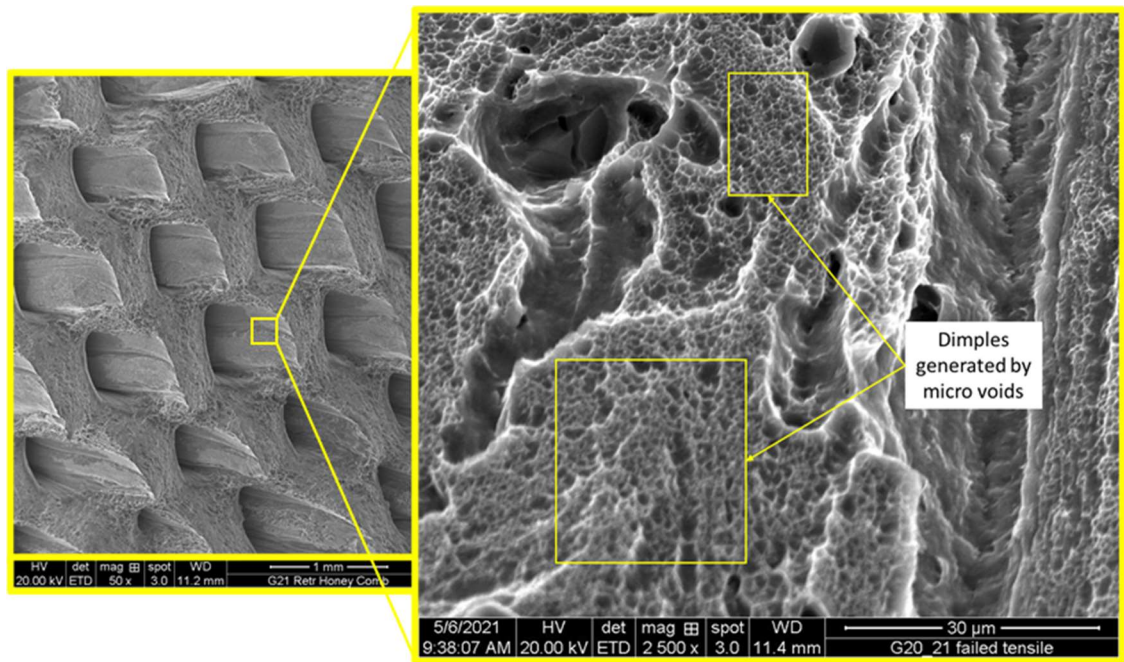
Dimpled fracture surface of G22 indicating ductile failure.
